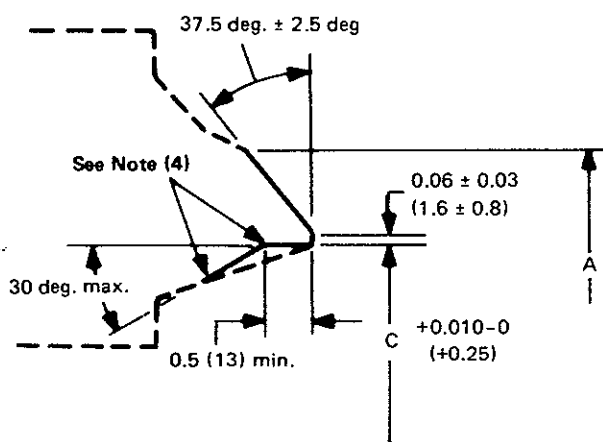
Welding End Detail for Joint Using Continuous Rectangular Backing Ring.
